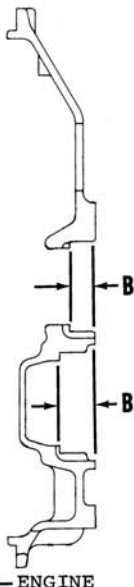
Measure (B) between bottom of front bearing race bores and mounting flange mating surface to determine shim thickness as outlined in text.
